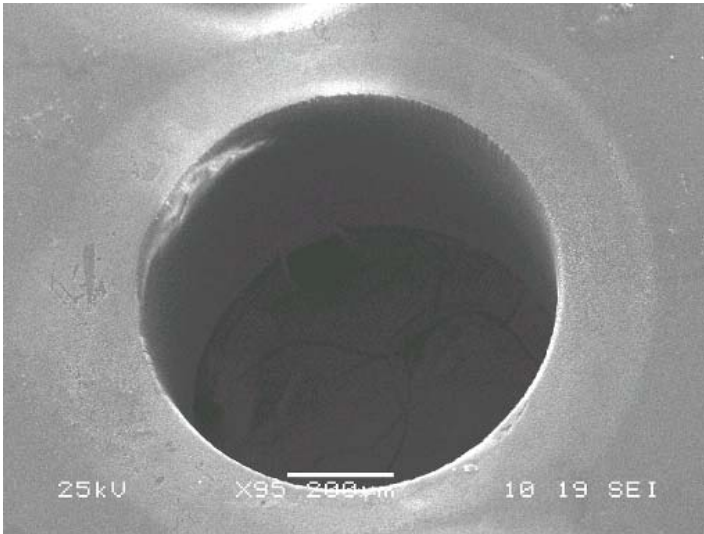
700 μm hole matching the pins of the MT ferrule
